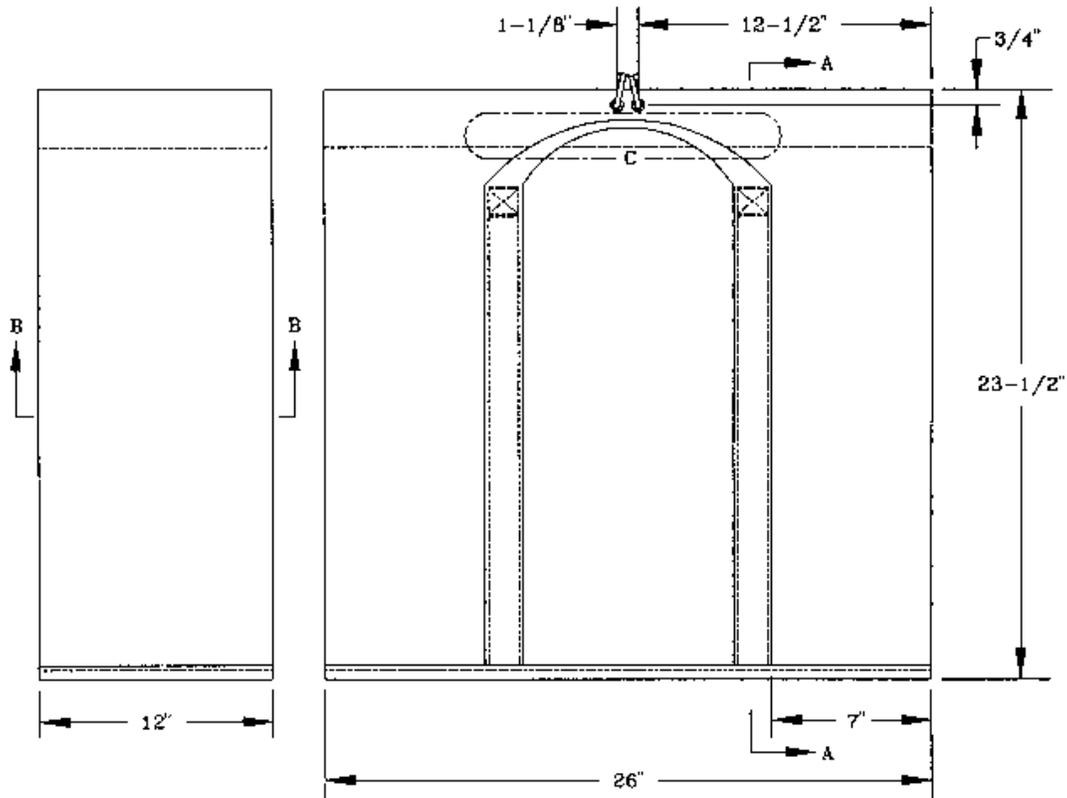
(CONTAINER FRONT MOUNTED) KIT, BAG ASSEMBLY (SHEET 1 OF 2)
